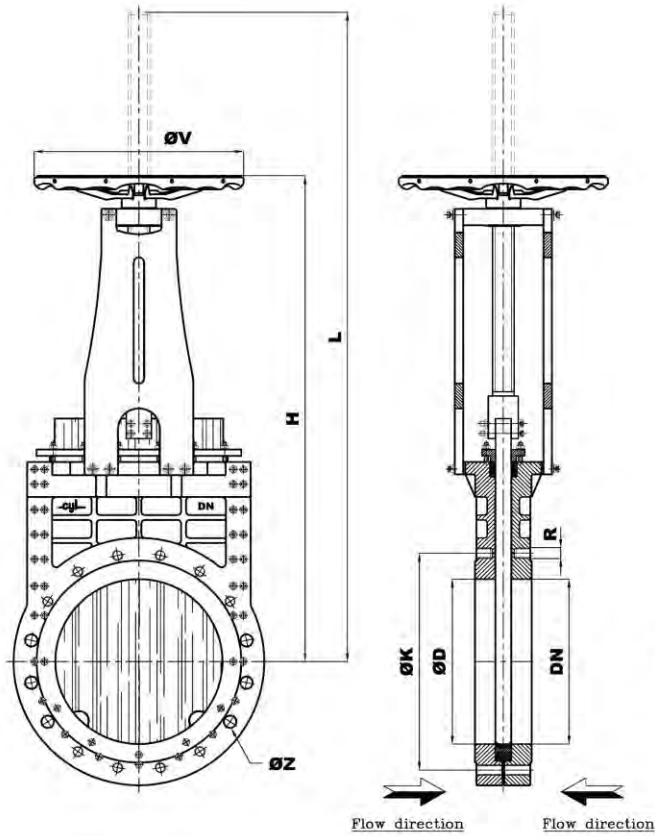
KGV XD-HP series rising stem with handwheel & gearbox
